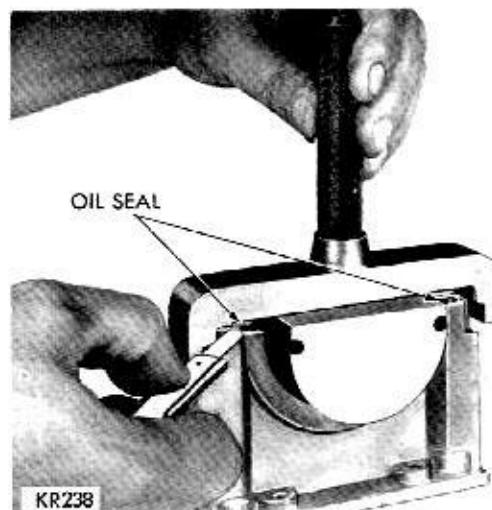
Trimming Rear Main Bearing Lower Oil Seal
